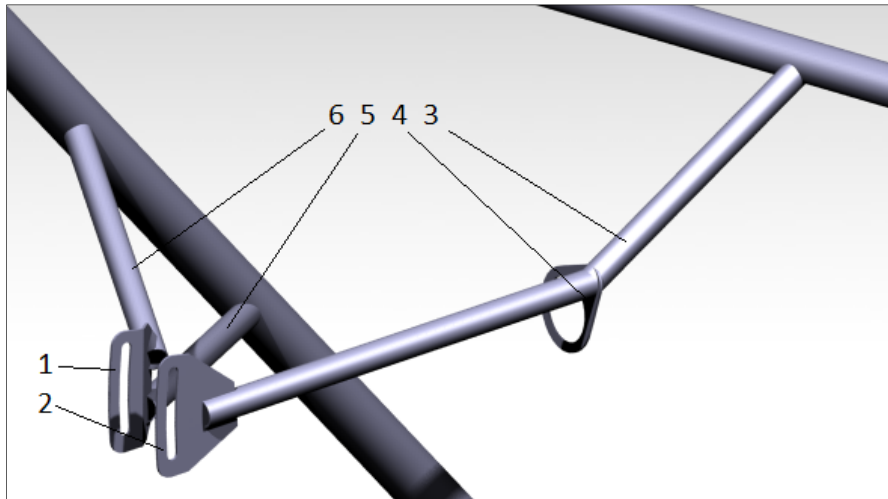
The installation of steering, 1 – steering wheel, 2 – mounting screw, 3 – wheel housing, 4 – steering column bracket, 5 – steering rod, 6 – Teflon bearing
